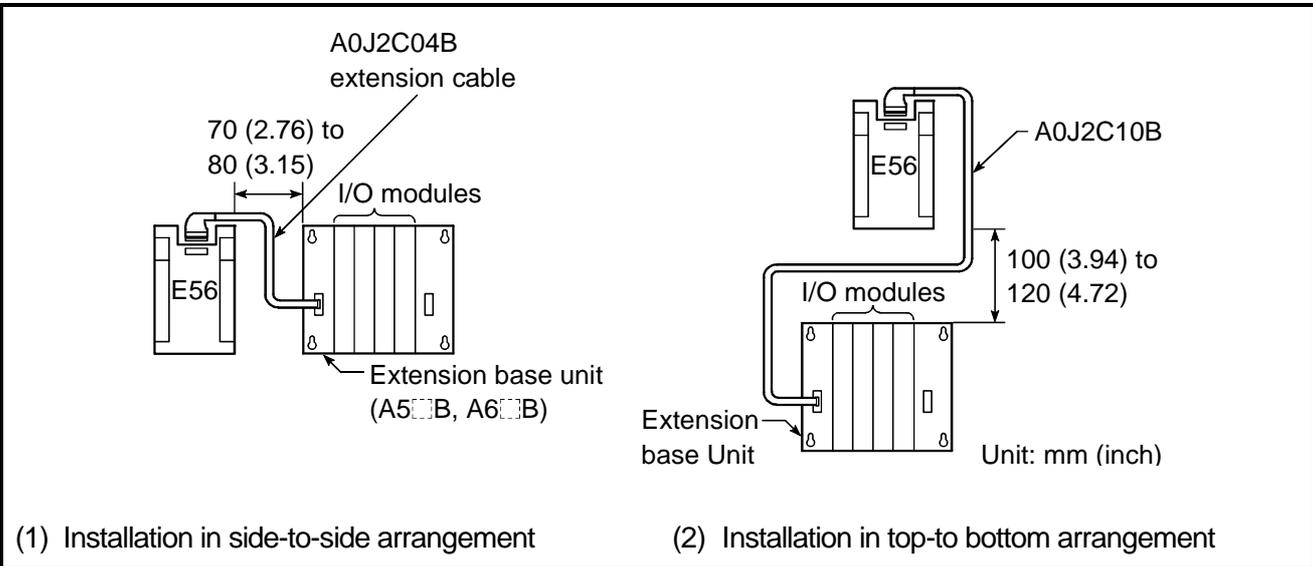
Dimensions for Module-to-Module Mounting
